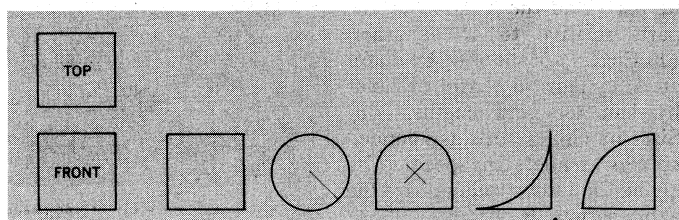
AMBIGUOUS FRONT AND TOP VIEWS: SIDE VIEW COULD BE ANY OF THOSE SHOWN AT RIGHT
